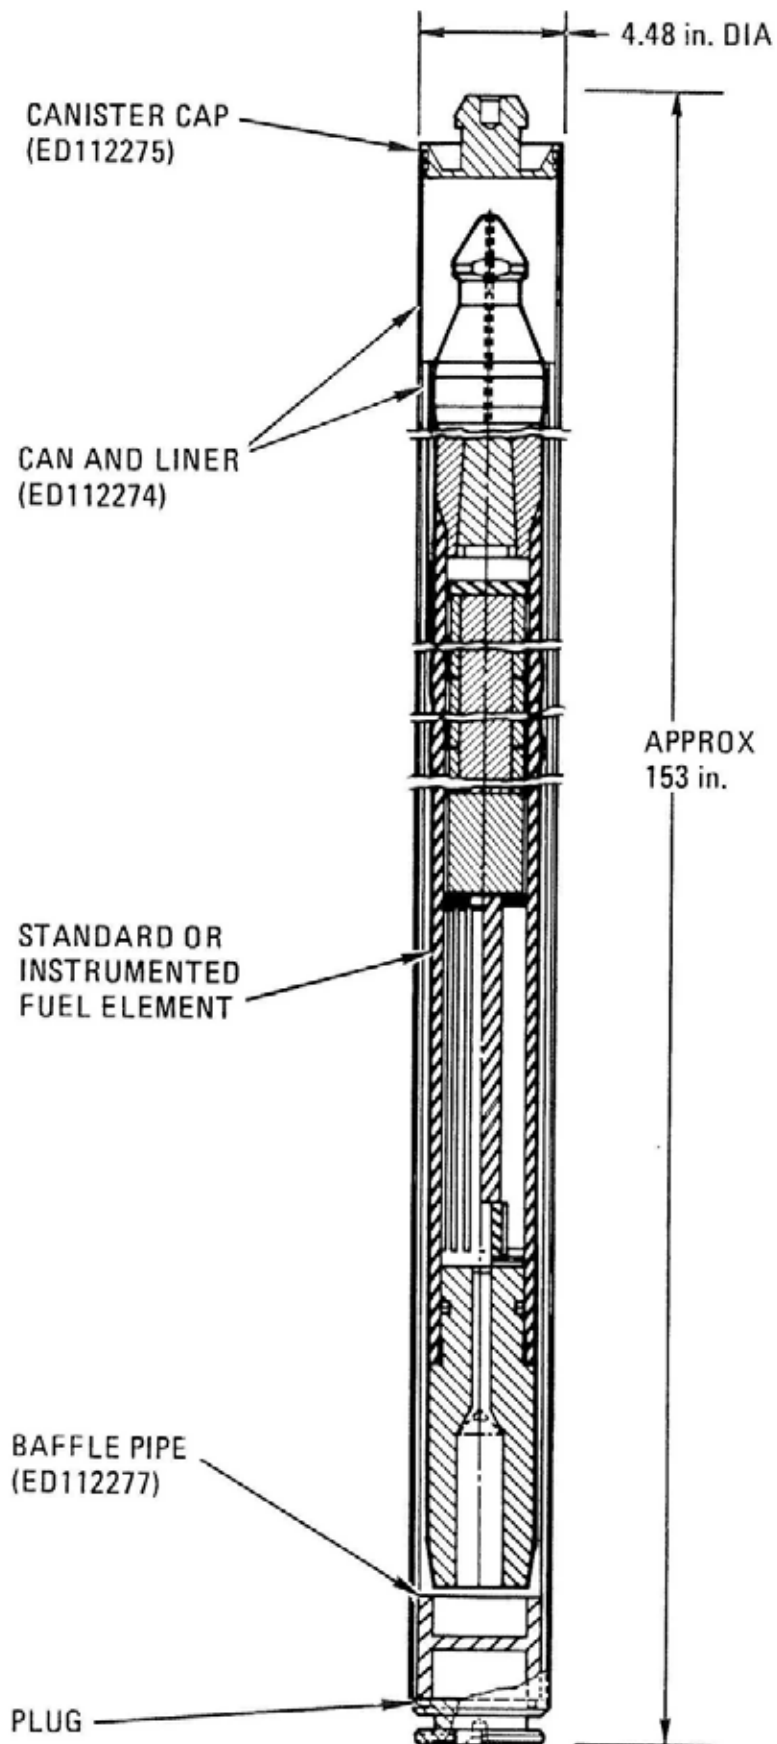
Peach Bottom core 1 non-failed fuel element storage canister.
